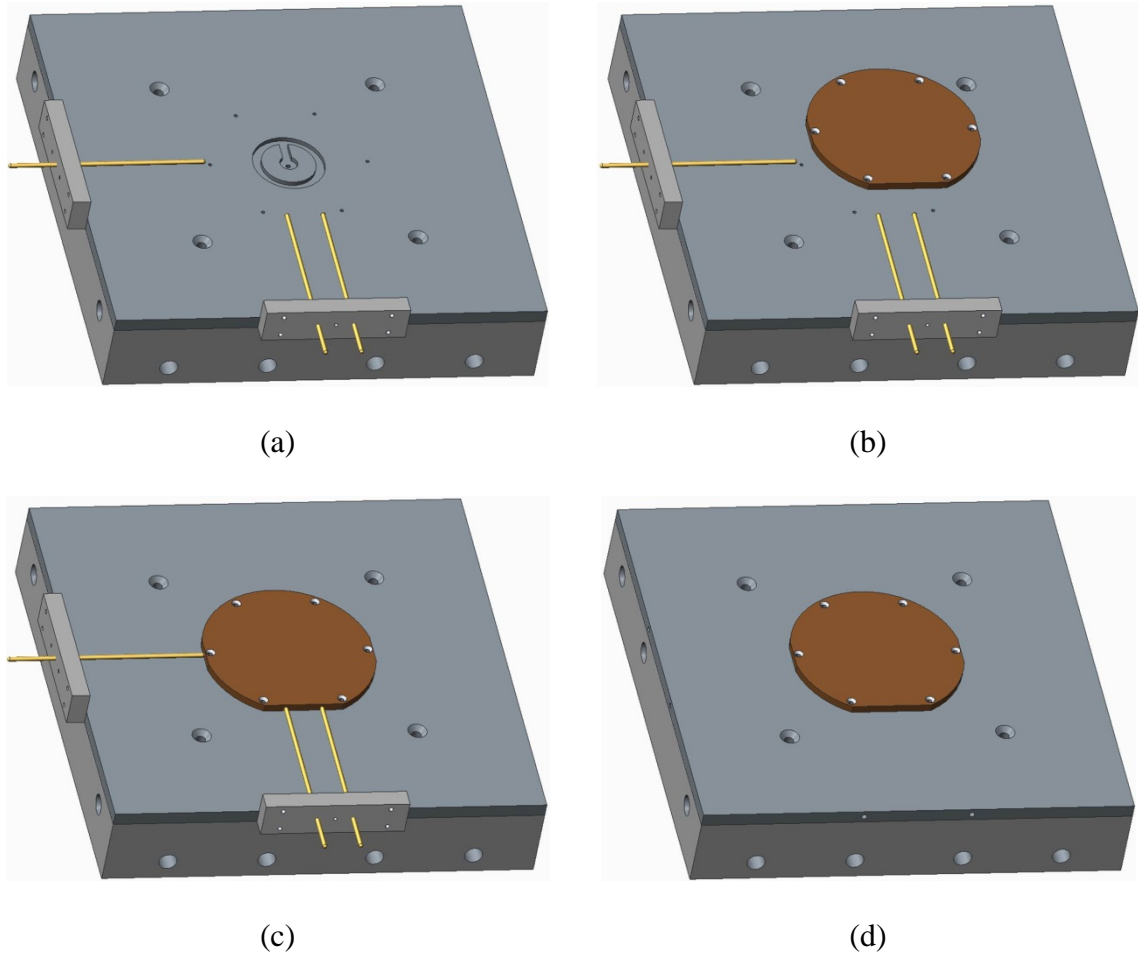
Depiction of the complimentary mold alignment procedure. To align, (a) the tooling is installed on the lower plate, (b) the complimentary mold insert is placed on the plate, (c) the complimentary mold insert is brought into contact with the threaded rods on the alignment tools, and (d) the alignment tools are removed prior to the hot embossing procedure.
